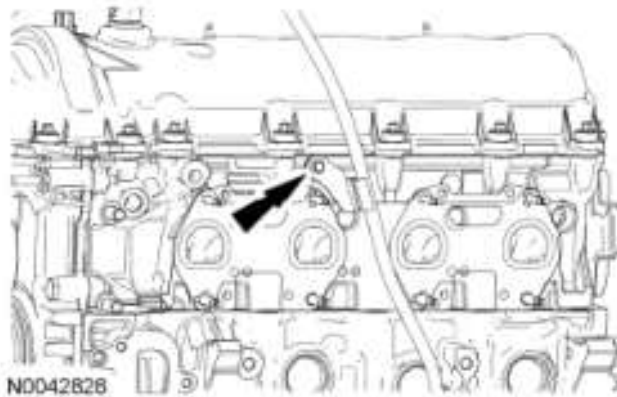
Locating Bolt And Oil Level Indicator Tube
